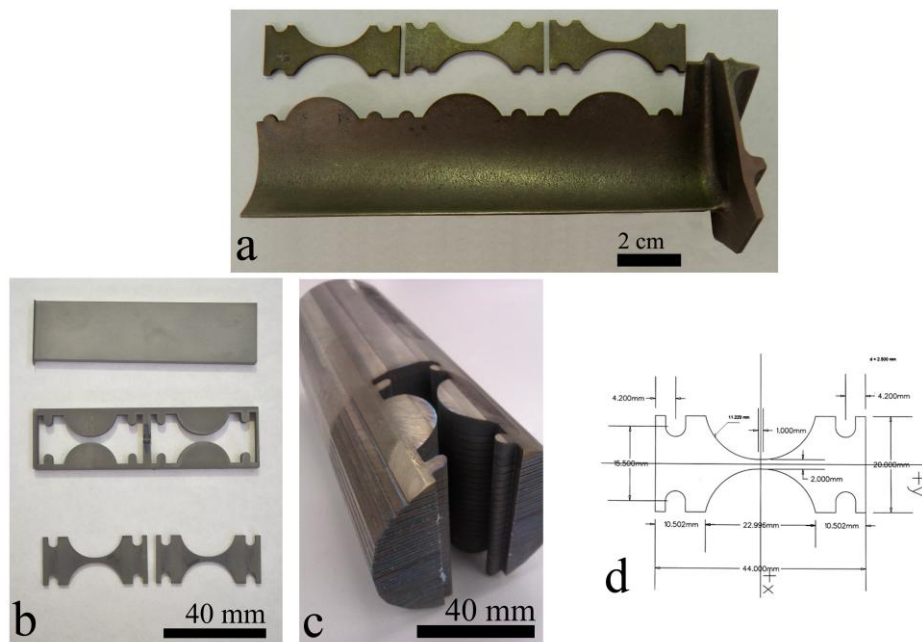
Test specimens machined from (a) LPT blades (CC-LPT), (b) centrifugally cast rectangular bars (CC), and (c) HIPed ingots (PM); (d) schematic drawing of the tensile
